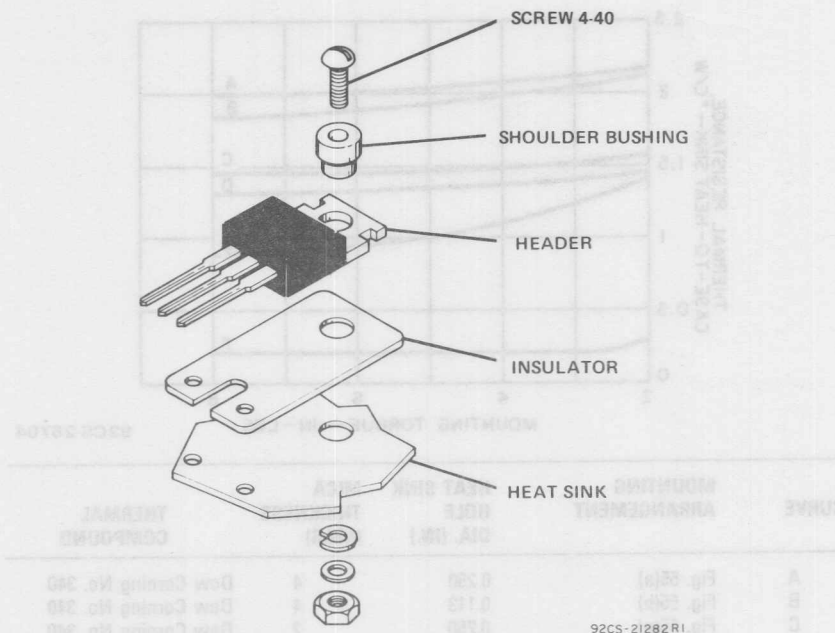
Mounting arrangement in which an isolating bushing is used to raise the head of the mounting screw above the plastic body of the VERSAWATT package.
